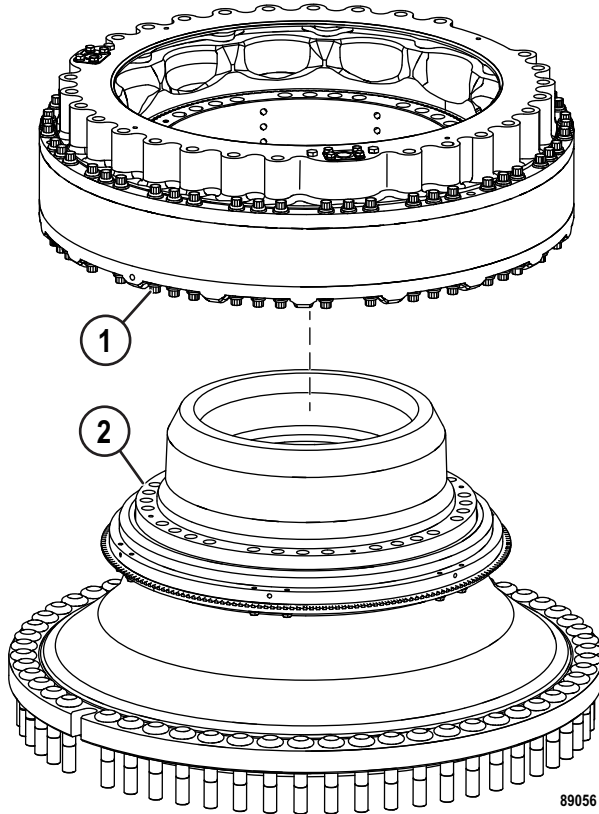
BRAKE ASSEMBLY REMOVAL
